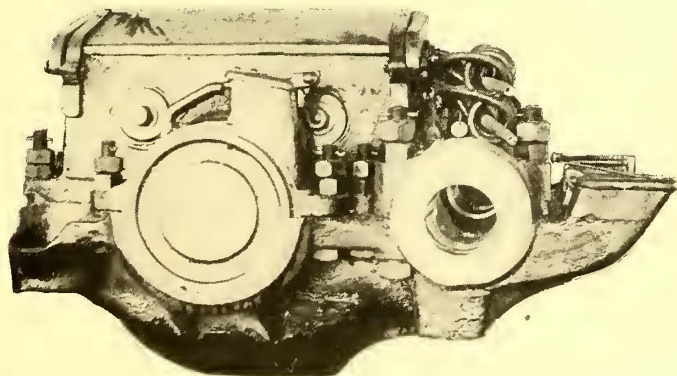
NEW MOTOR WITH OIL LUBRICATION
